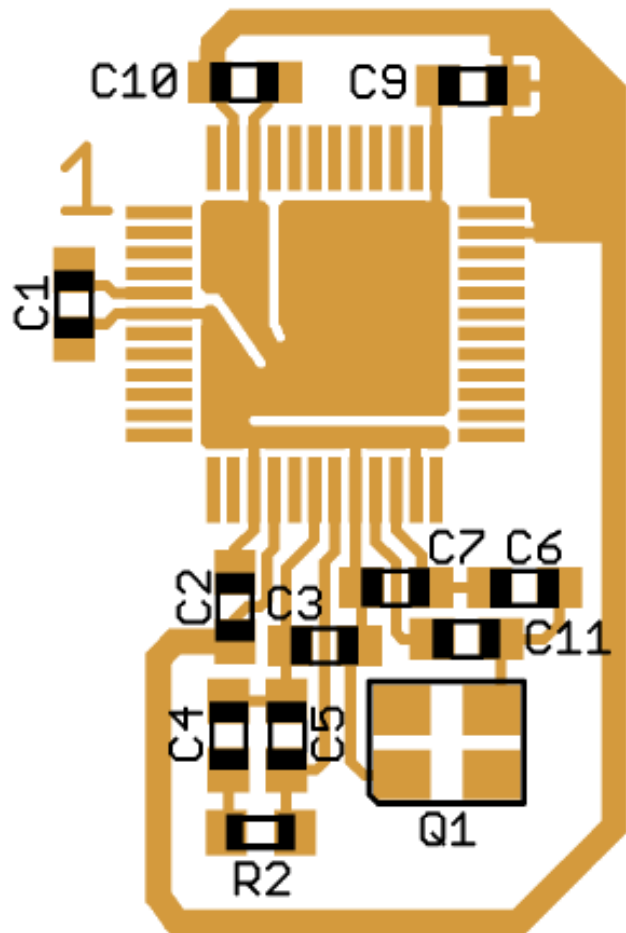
Recommended PCB Layout (48 LQFP) Colpitts Oscillator
